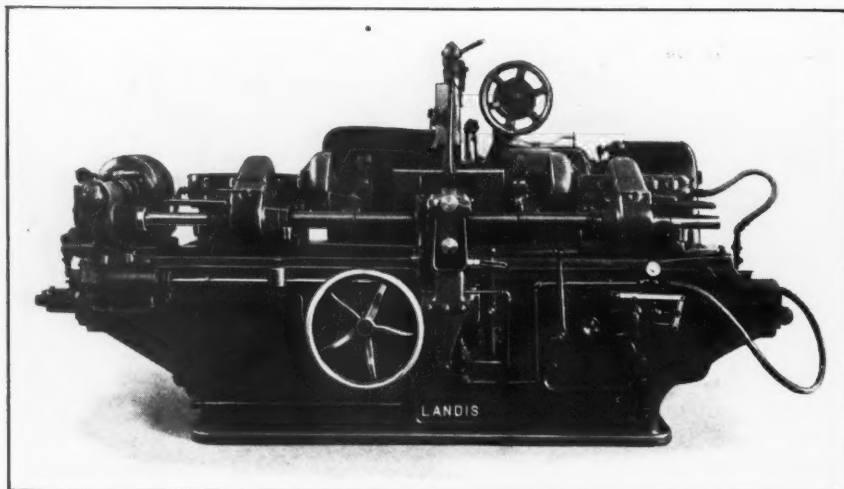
Landis Hydraulic Crankpin Grinding Machine of Improved Design
